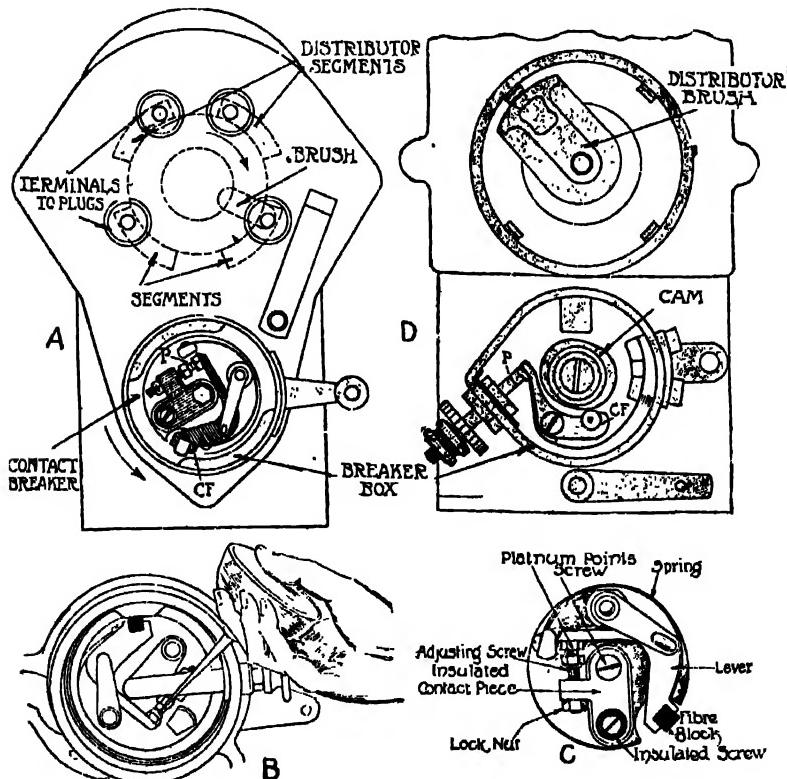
Illustrating Methods of Adjusting and Caring for Magneto Contact Breakers.
